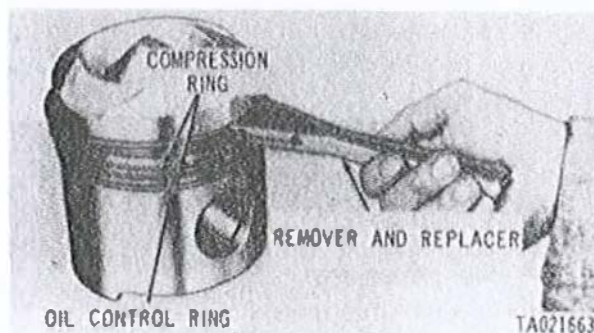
Removing or installing piston compression rings using remover and replacer.
